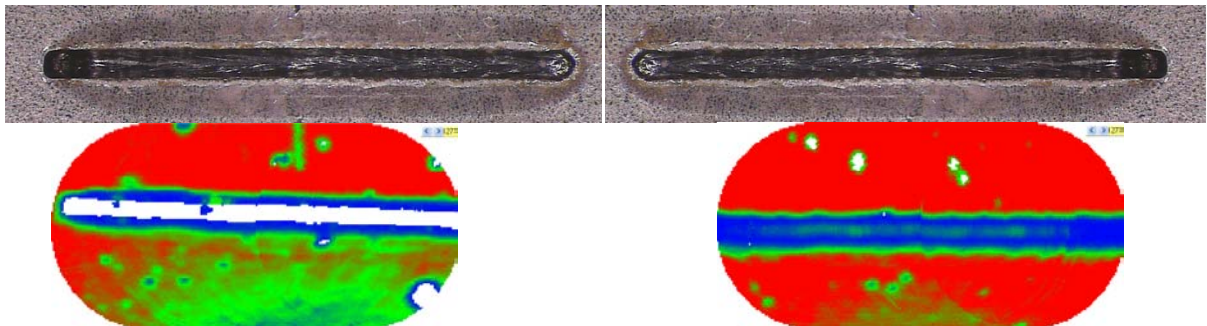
Weld top bead (0.3mm gap, sample C) and Amstech result from top bead (L) and bottom bead (R)
